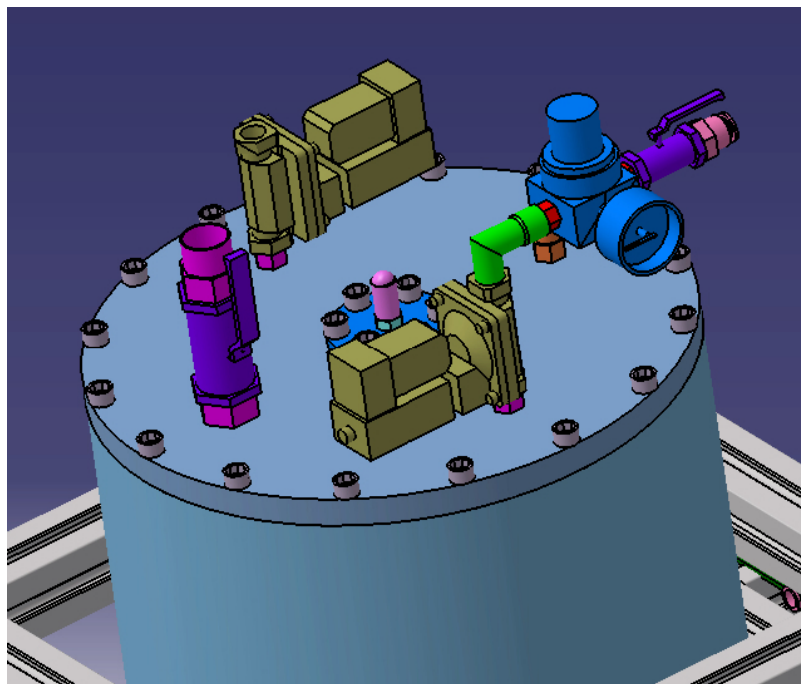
Test cell equipment which are mounted on the top of the pressure vessel
